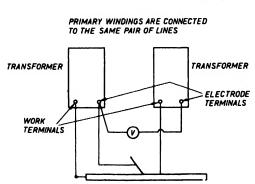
Paralleling of welding transformers, polarity test.
